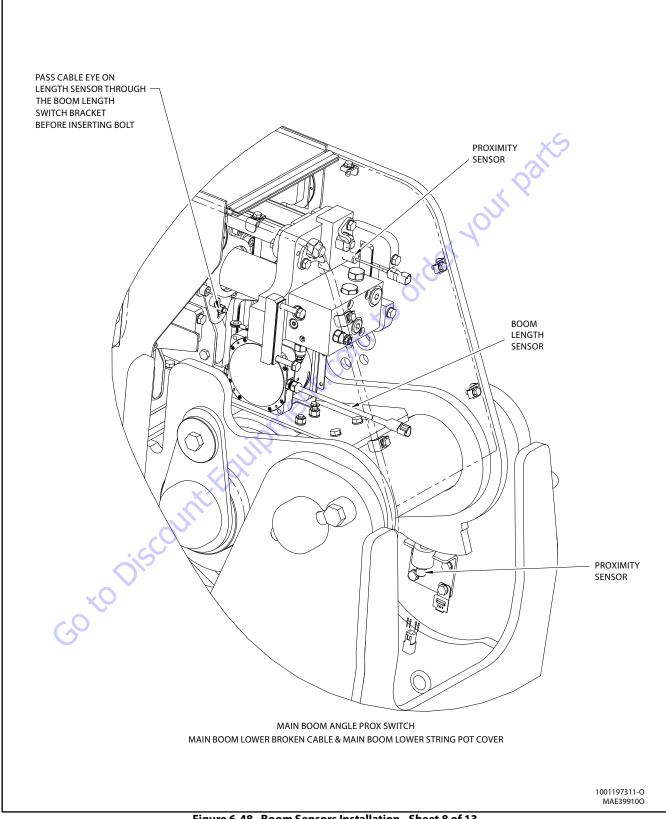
Boom Sensors Installation - Sheet 8 of 13
